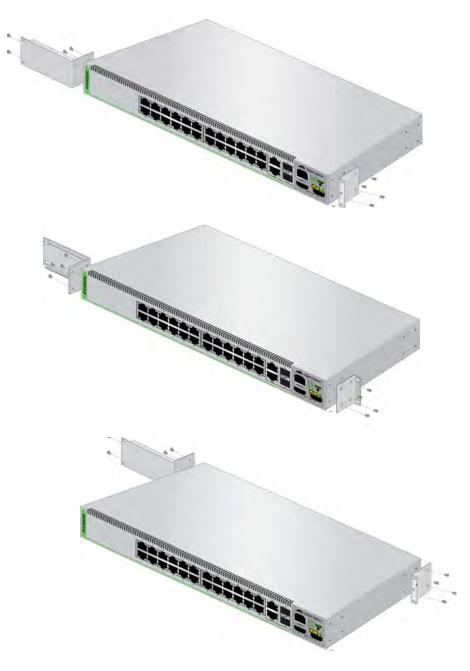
Attaching the Brackets to 8100L and AT-8100S/24C Switches for Equipment Rack Installation
